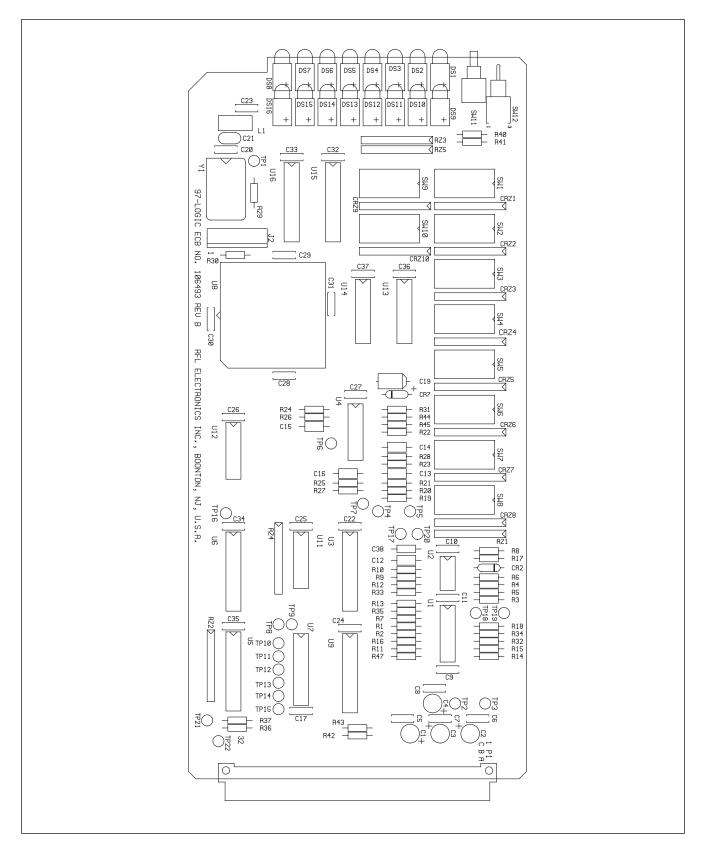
Component locator drawing, RFL 9780 Logic Module (Assembly No. 106490)
